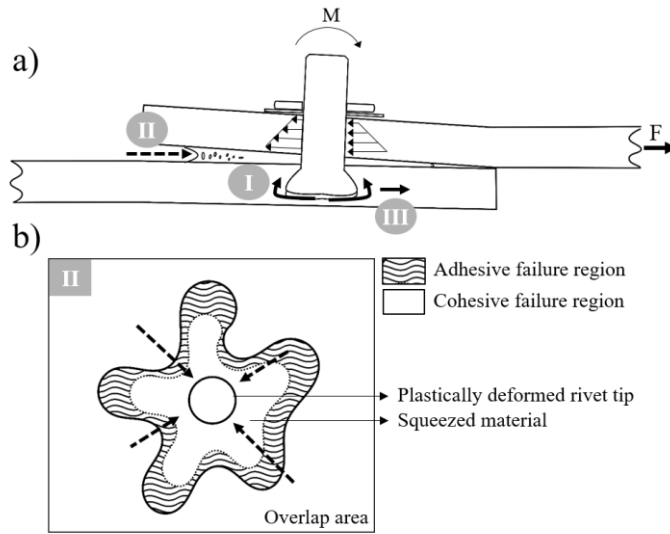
a) Schematic of the failure path in overlap friction riveted joints under shear loading; b) schematic of the fracture surface in the overlap area of friction riveted joints, indicating radial crack propagation from adhesion to cohesion failure regions.
